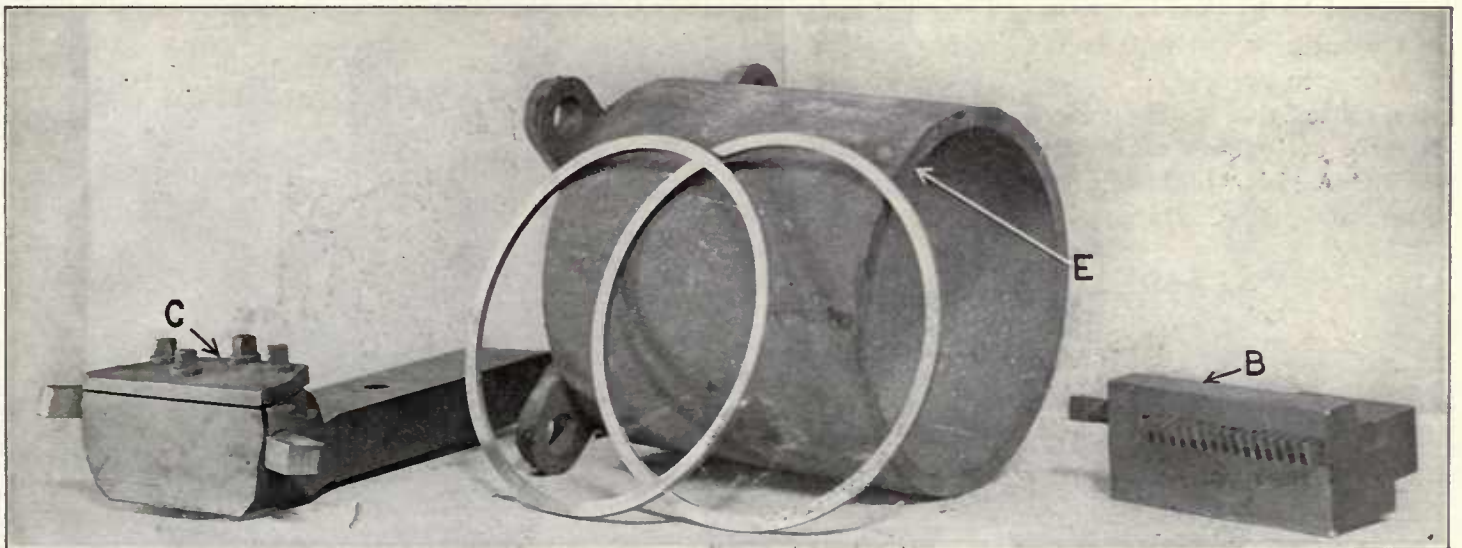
Tools for Boring and Cutting Off Packing Rings for Air Pump.
